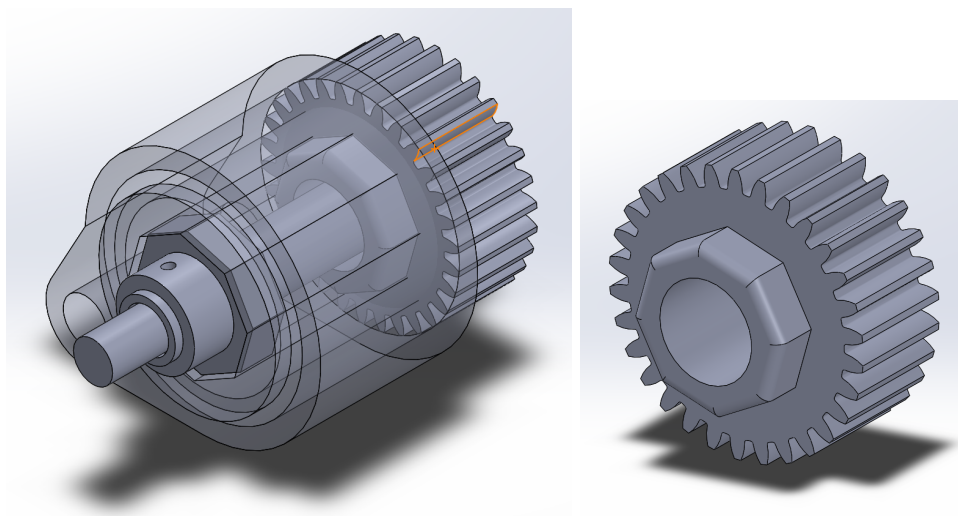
Grooved Sleeve and First Transfer Case Gear Solidwork Parts
